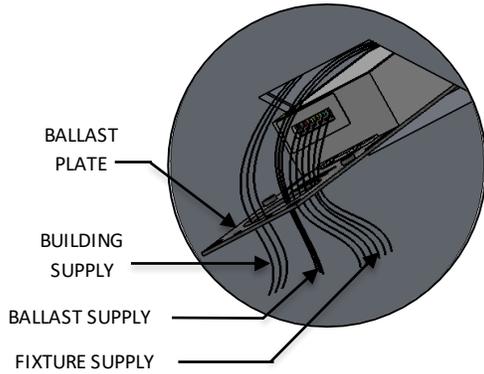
DETAIL SHOWING BUILDING SUPPLY AND DRIVER WIRE
